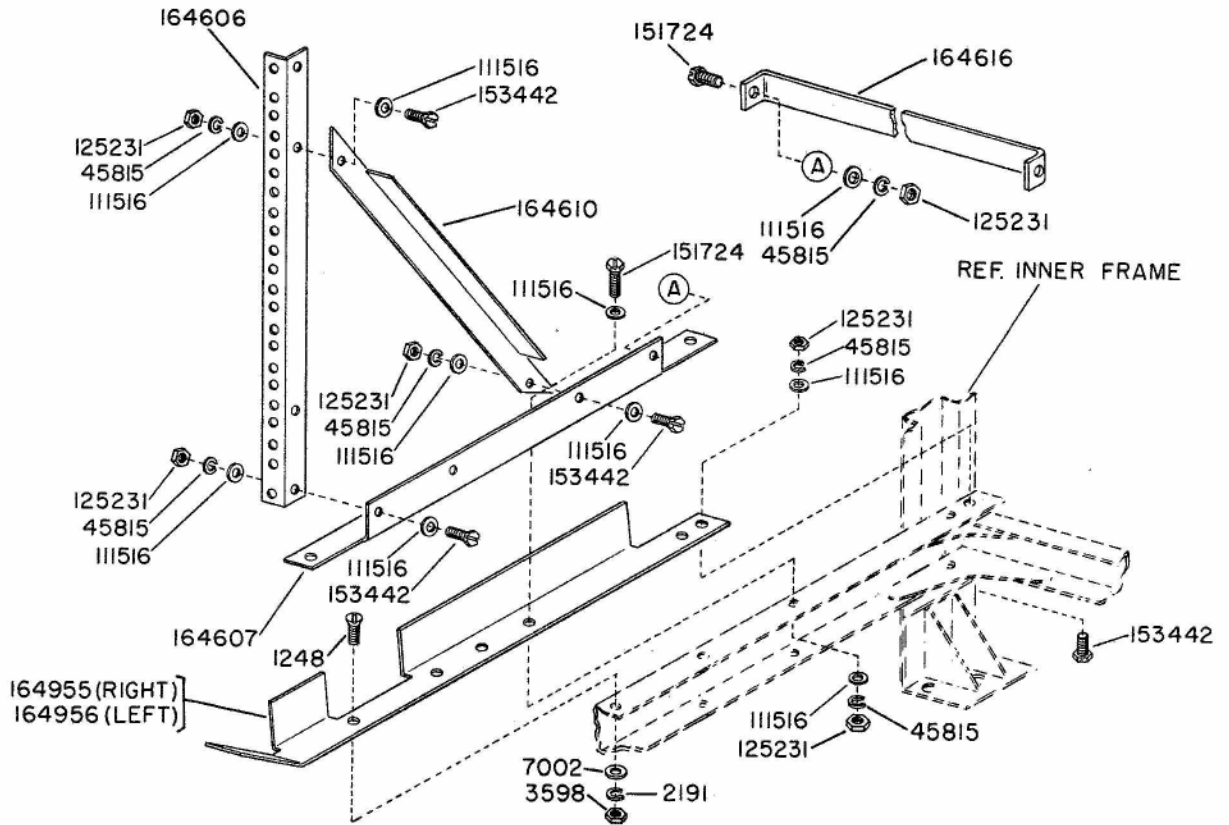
RELAY RACK FRAME ASSEMBLY
